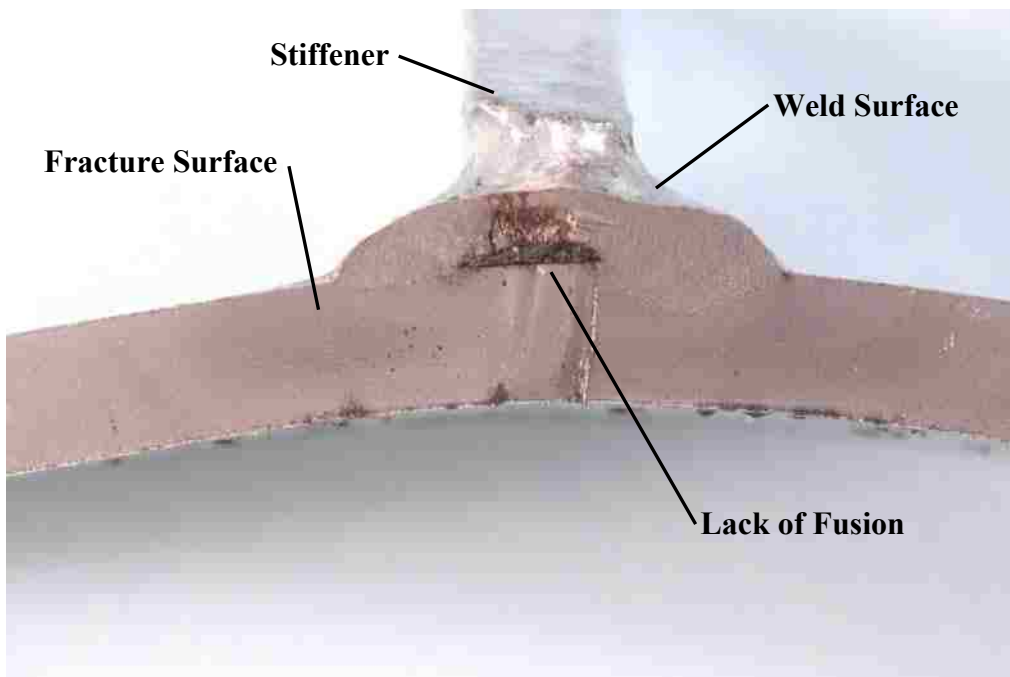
Fatigue cracking from lack of fusion defect in specimen XII-6
